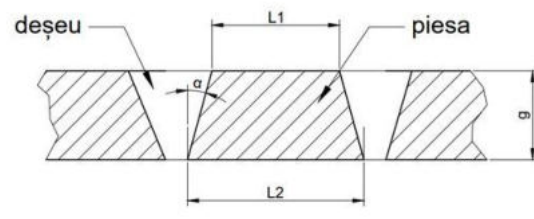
Cutting slot with inclined flanks. (b) shape V
